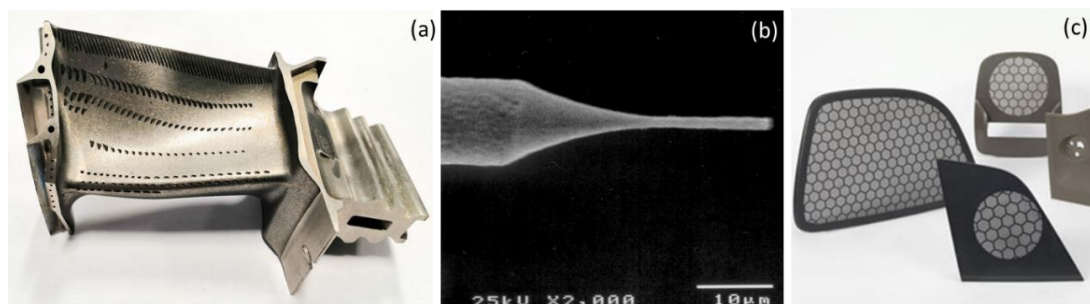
Examples of parts manufactured by EDM: (a) Cooling holes on a turbine blade (hole drilling EDM), (b) micro-rod (micro-EDM) [4], (c) Car speaker grills (Die-sinking EDM) [5].
